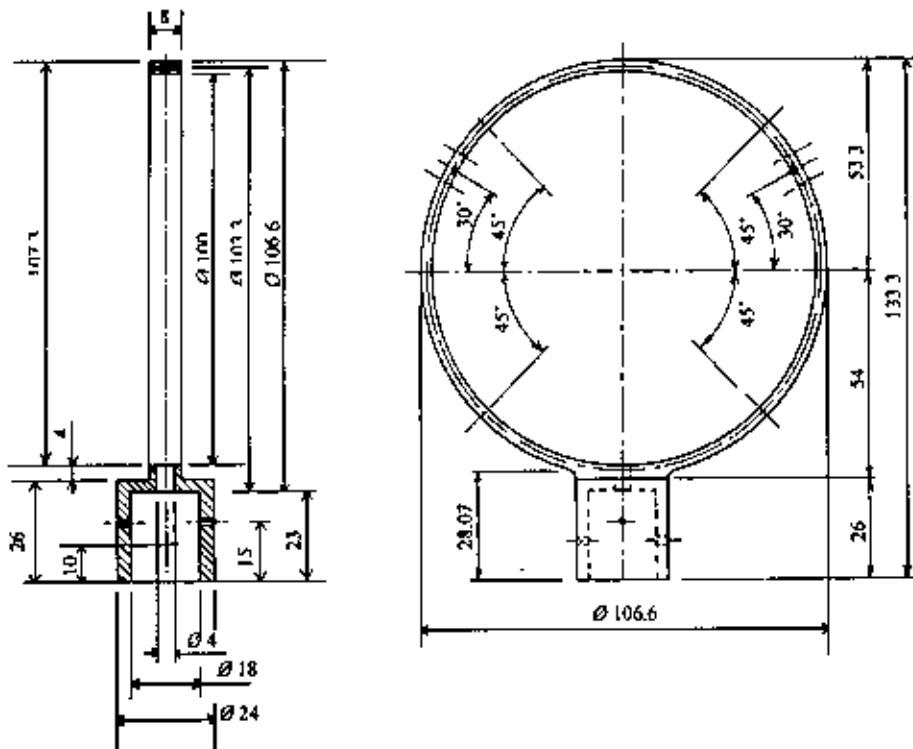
(a) Lateral view and (b) cross-sectional view of the P60A Ionization Chamber (all dimensions are in mm)
